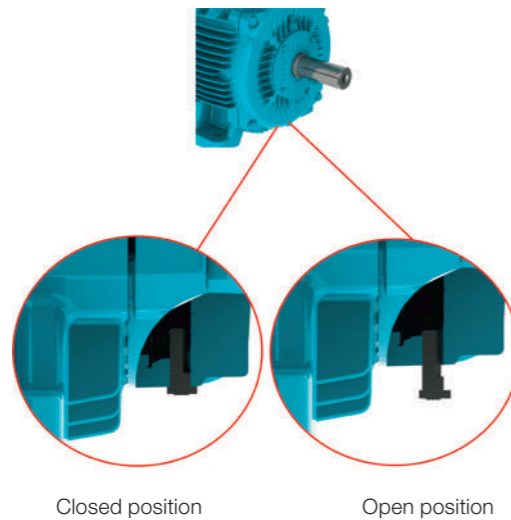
Detail of the rubber drain plug mounted in a closed and open position.
